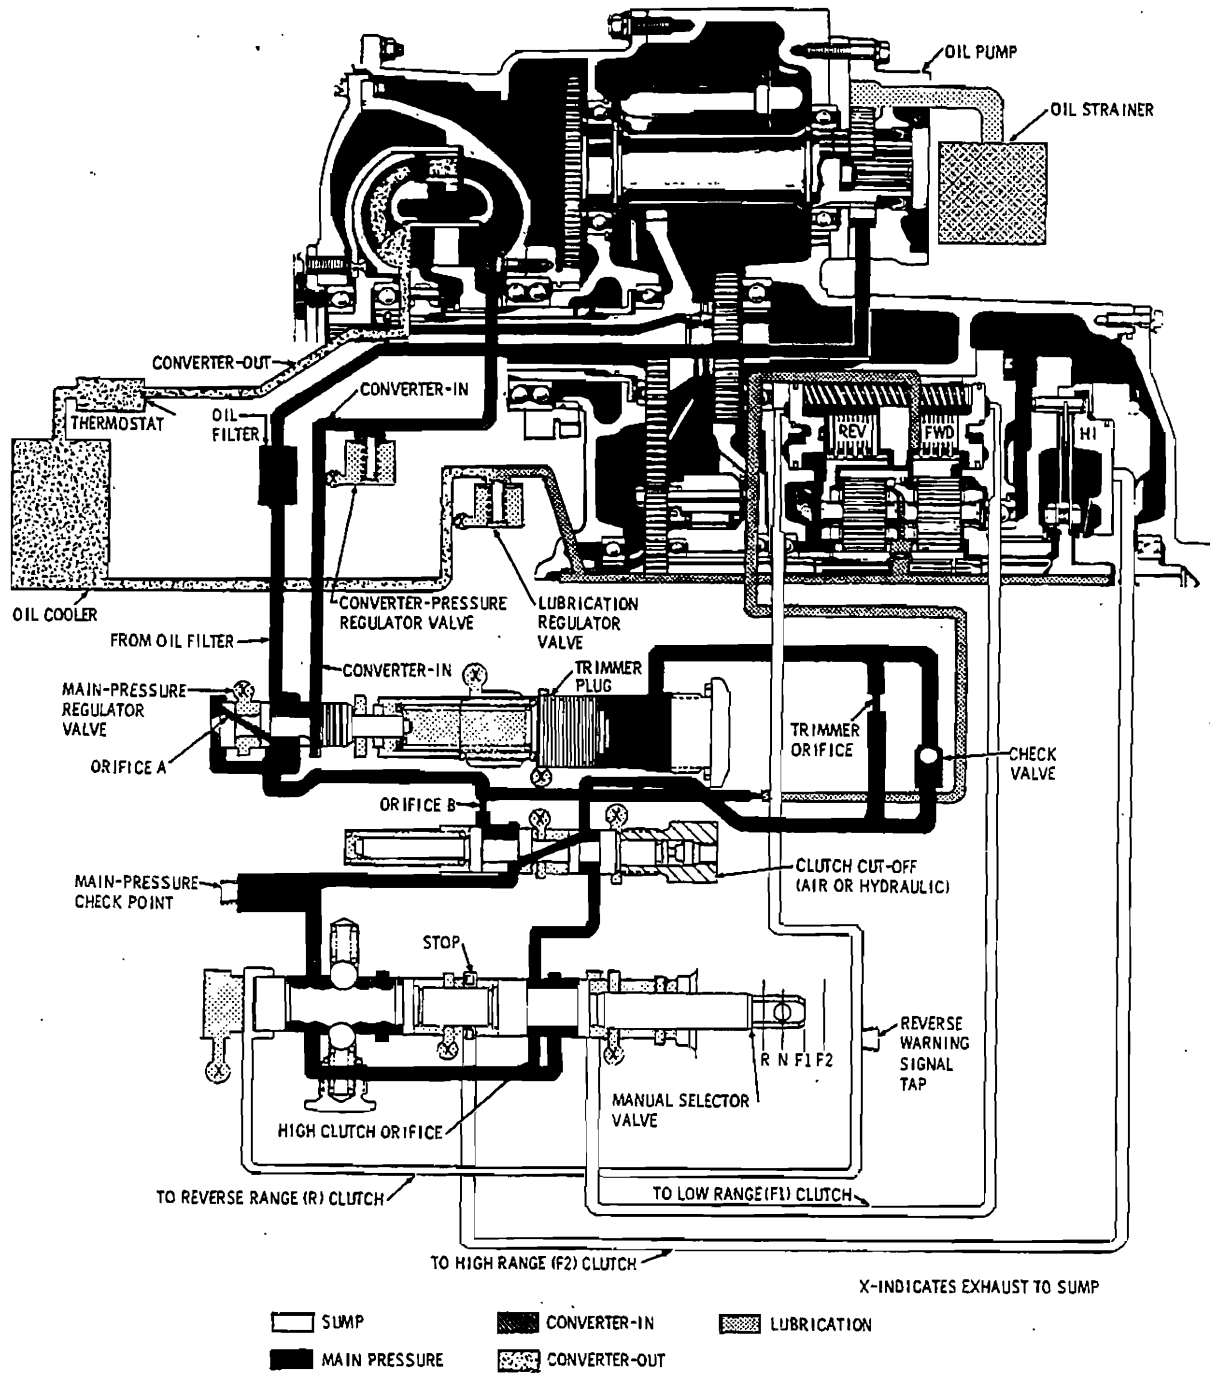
HYDRAULIC SYSTEM - SCHEMATIC VIEW
